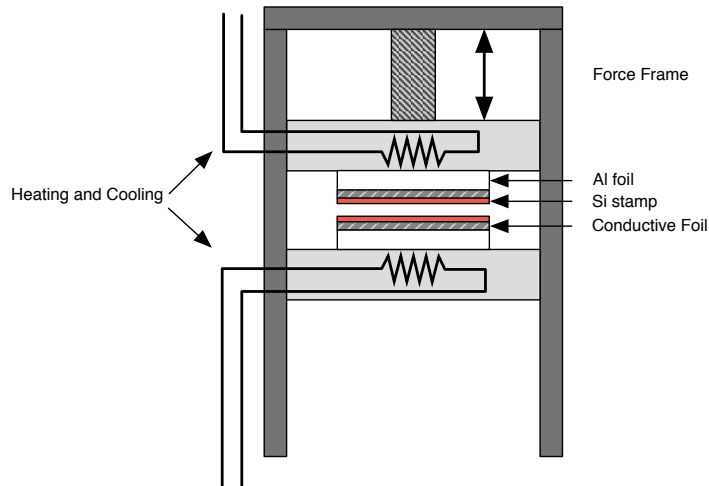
Schematic drawing of the thermal-NIL equipment
